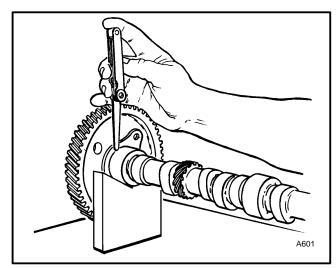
CHECK THE CLEARANCE BETWEEN THRUST PLATE AND THE CAMSHAFT
